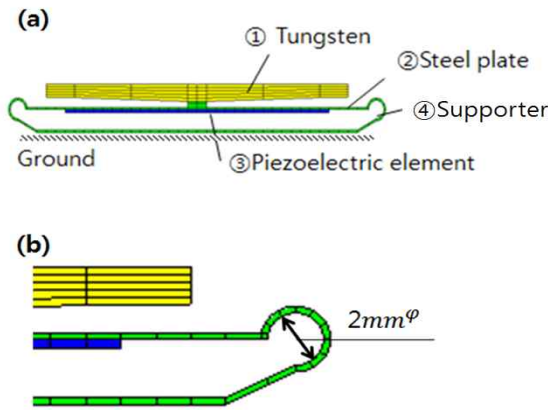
Type 2 actuator using hinge-lever mechanism. (a) Cross-sectional view of the type 2 actuator and (b) diameter of circle in supporter; 2 mm.
